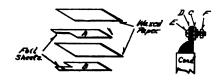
METHOD OF ASSEMBLING THE CONDENSER
